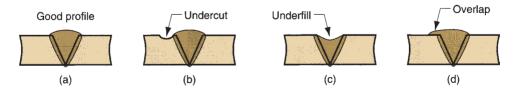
(a) Desired weld profile for single V-groove weld joint. Same joint but with several weld defects: (b) undercut, in which a portion of the base metal part is melted away; (c) underfill, a depression in the weld below the level of the adjacent base metal surface; and (d) overlap, in which the weld metal spills beyond the joint onto the surface of the base part but no fusion occurs.
